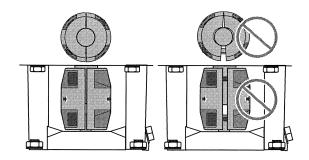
Make Sure that the Coupling Halves are Evenly Tightened
